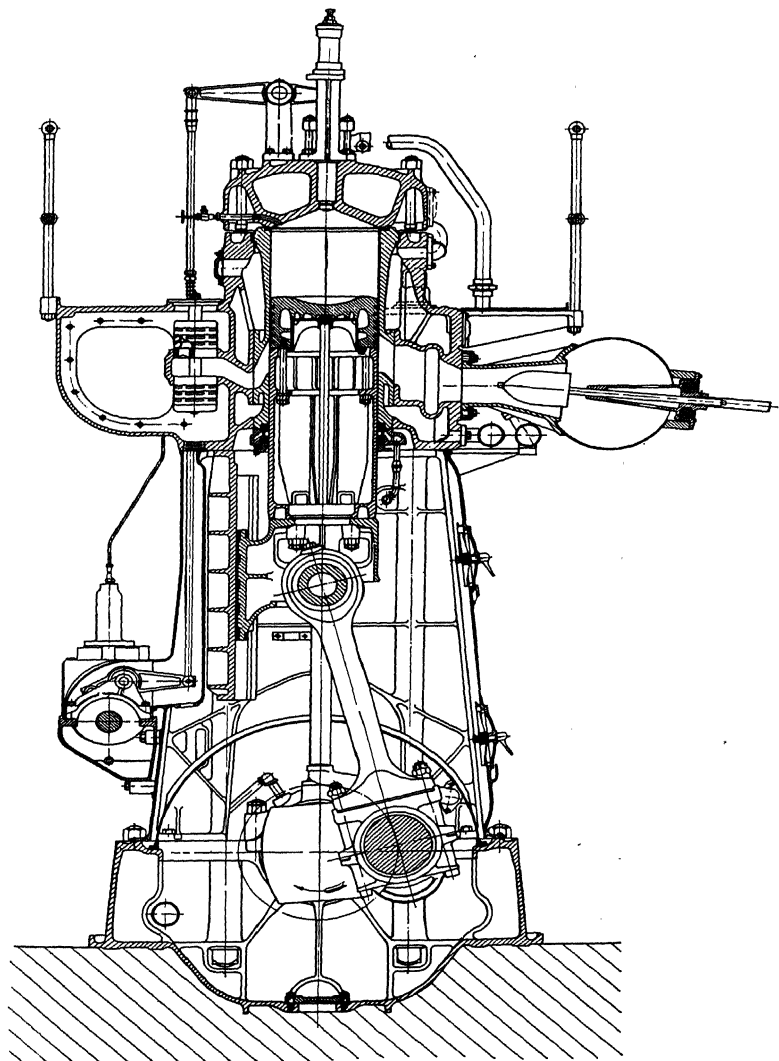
Sectional view of engine with cross-head piston construction. (Courtesy of Nordberg Manufacturing Company.)
